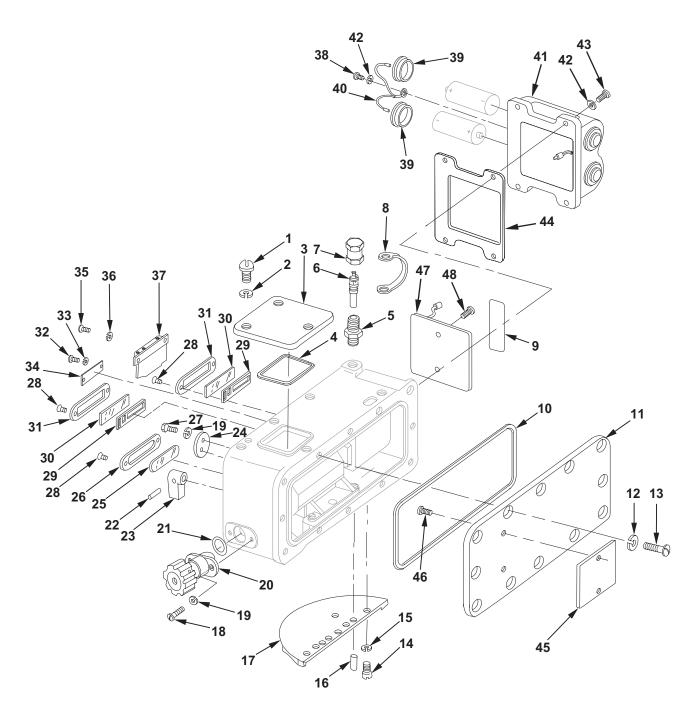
Counter Box Assembly, M137, 11741102-1, and Counter Box Assembly, M137A2/M137A3, 12984734, External Parts.
